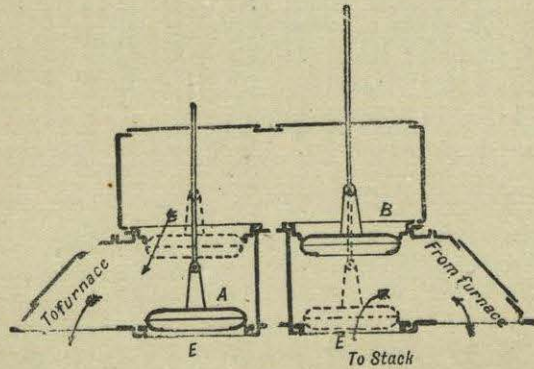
Hollow Disc Reversing Valve. Position, A, open to regenerators and furnace; position, B, products of combustion passing from furnace to the stack.
